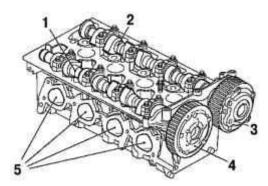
The head of the cylinder - petrol engine Z 18 XER DOHC-I: 1 - camshaft drive intake valves, 2 - camshaft drive of the exhaust valves, 3 - Leading gear camshaft drive intake valves, 4 - Leading gear camshaft drive of the exhaust valves, 5 - inlet channels
